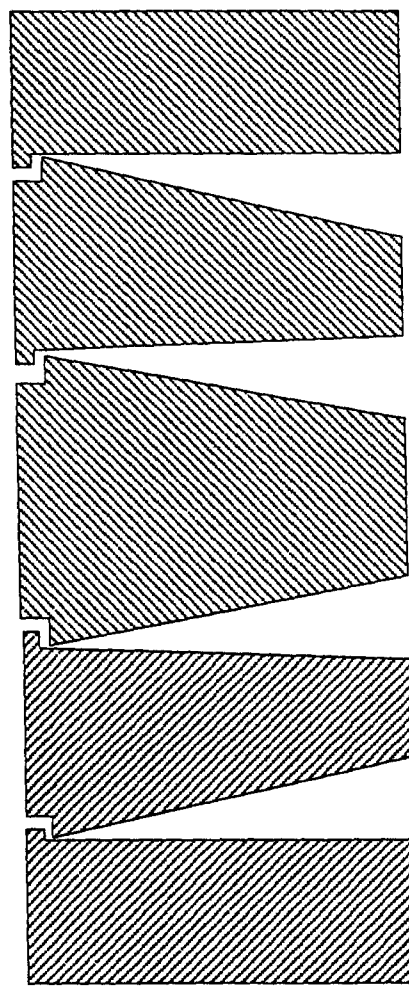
Schematic drawing of the "non-recessed" nozzle.
